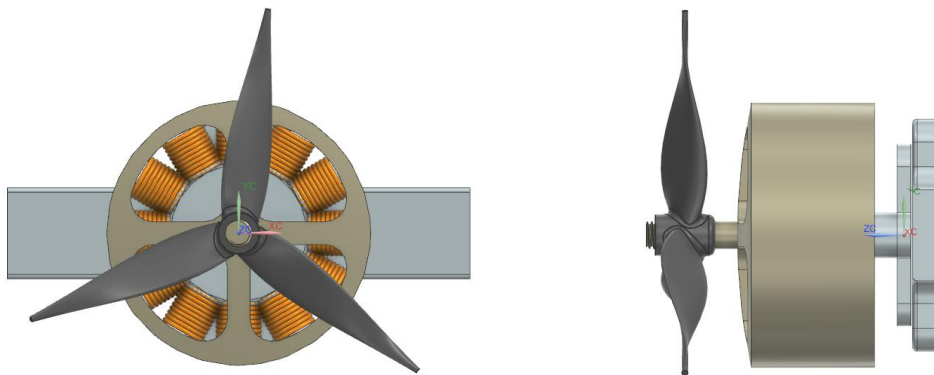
SIDE MOTOR SUB-ASSEMBLY
